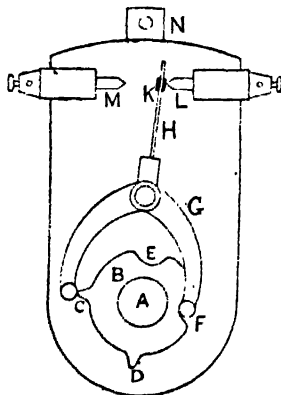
CONTACT BREAKER OF TWO-CYLINDER ENGINE.
